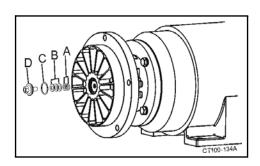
Install Shims, Belleville Washers and Impeller Retainer with O-Ring
